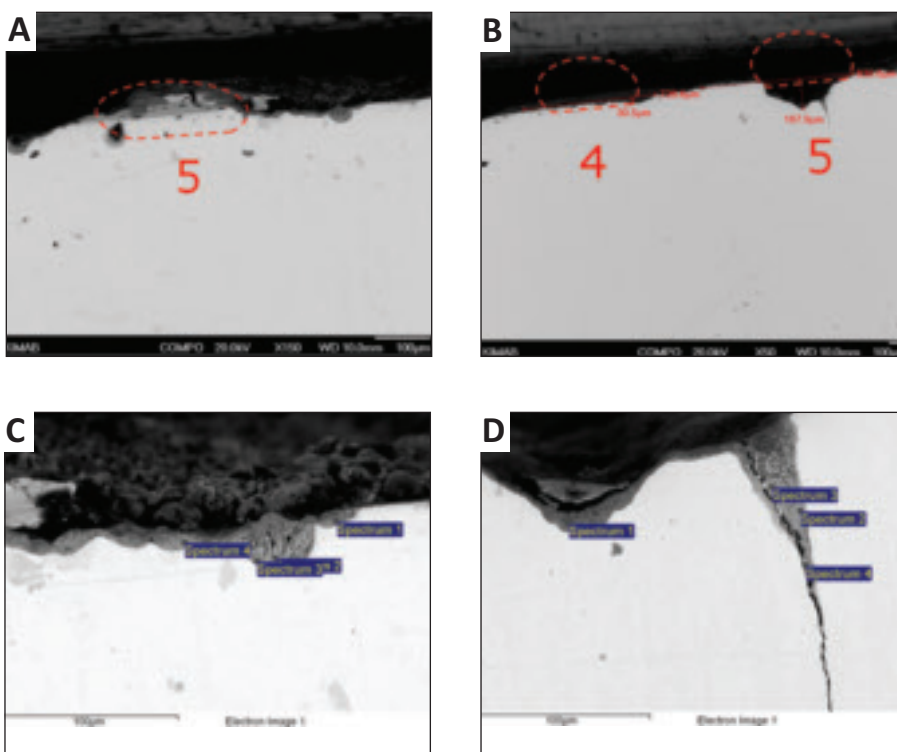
SEM images after welding AA5754-O with electrode C15760. A — Peak 5 after 40 welds; B — peaks 4 and 5 after 100 welds; C — higher magnification of peak 5 after 40 welds; D — higher magnification of peak 5 after 100 welds.
